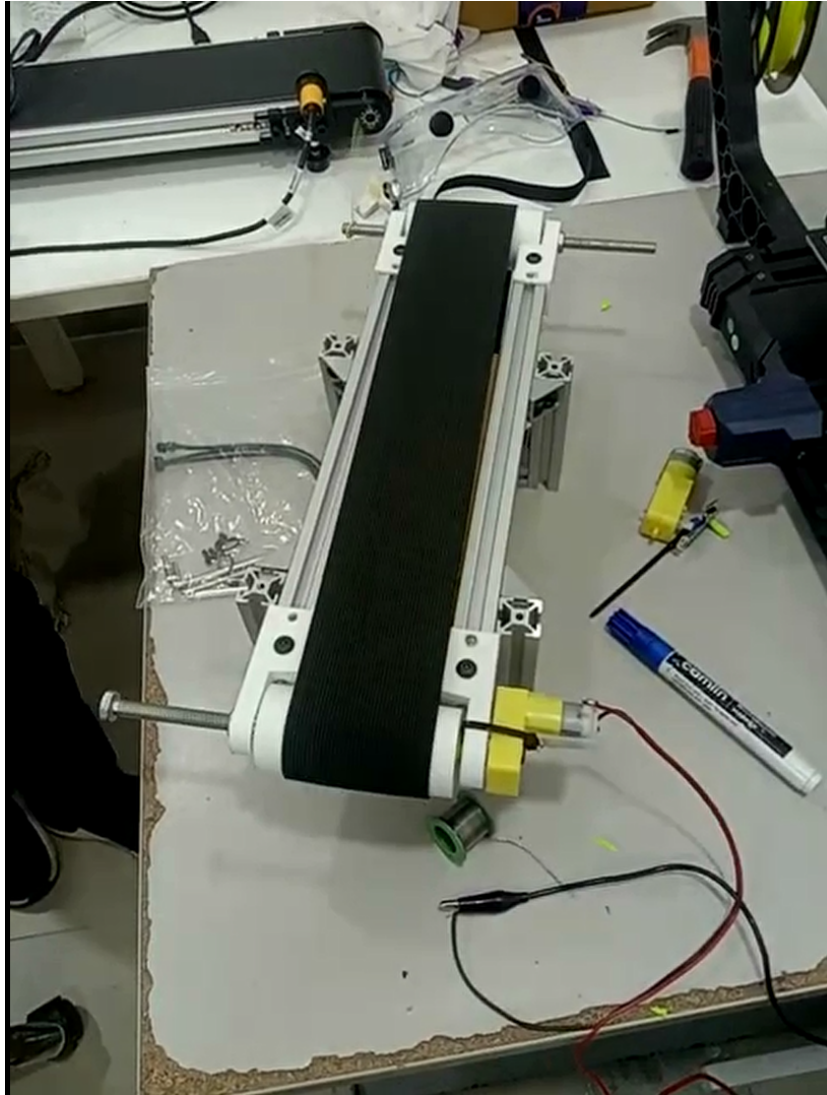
The fully assembled Phase 3 automated conveyor, featuring the taut synthetic belt, 2020 aluminum structural frame, direct-drive BO motor, and M8 dead-shaft bearing integration.
